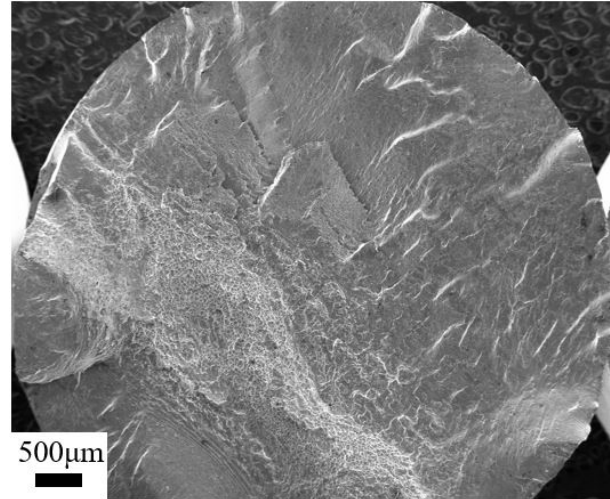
General view of the fatigue fracture surface of unburnished DSS sample broken in 36.832 cycles, at 95% of σ_{yield} .
